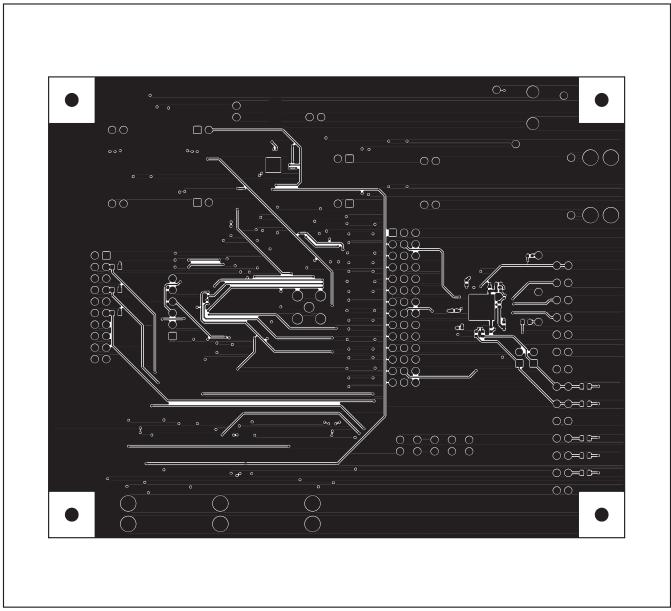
MAX9853 EV Kit PCB Layout—Solder Side
